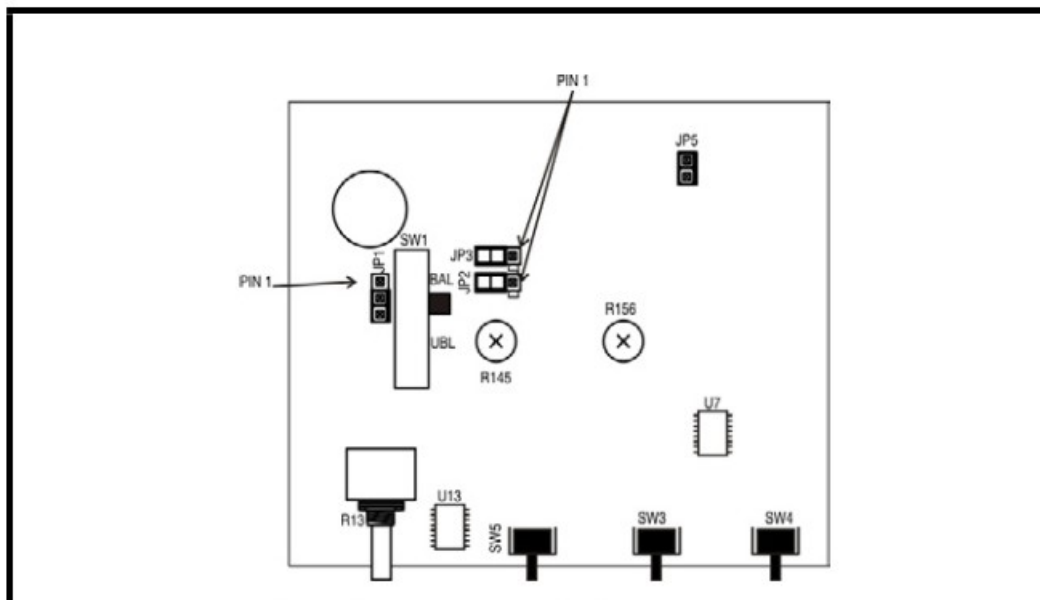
Internal Switches, Jumpers, and Adjustments
